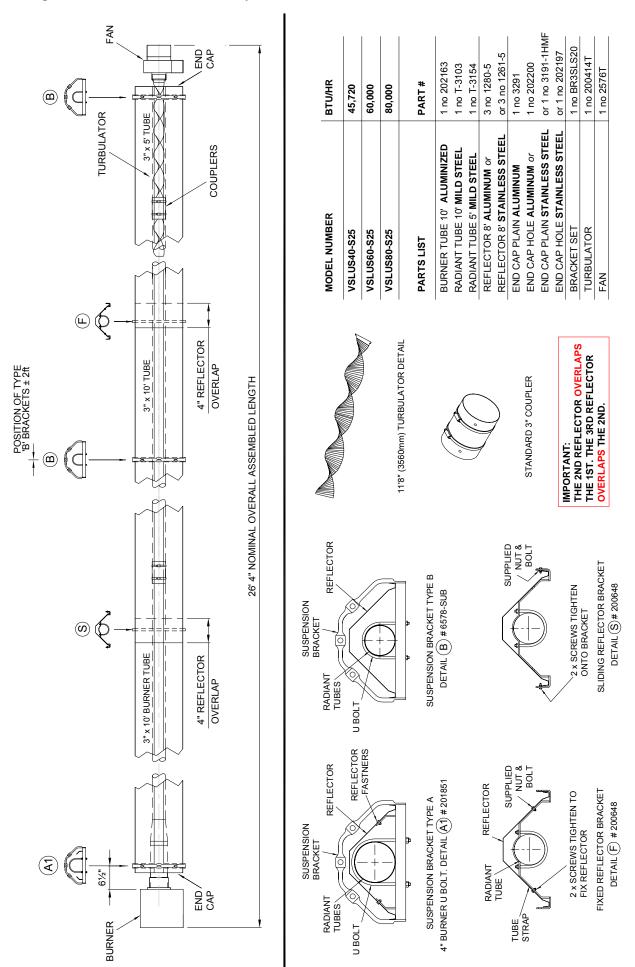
VSLUS Heater Assembly: Model Linear 40S30, 60S30 and 80S30.
